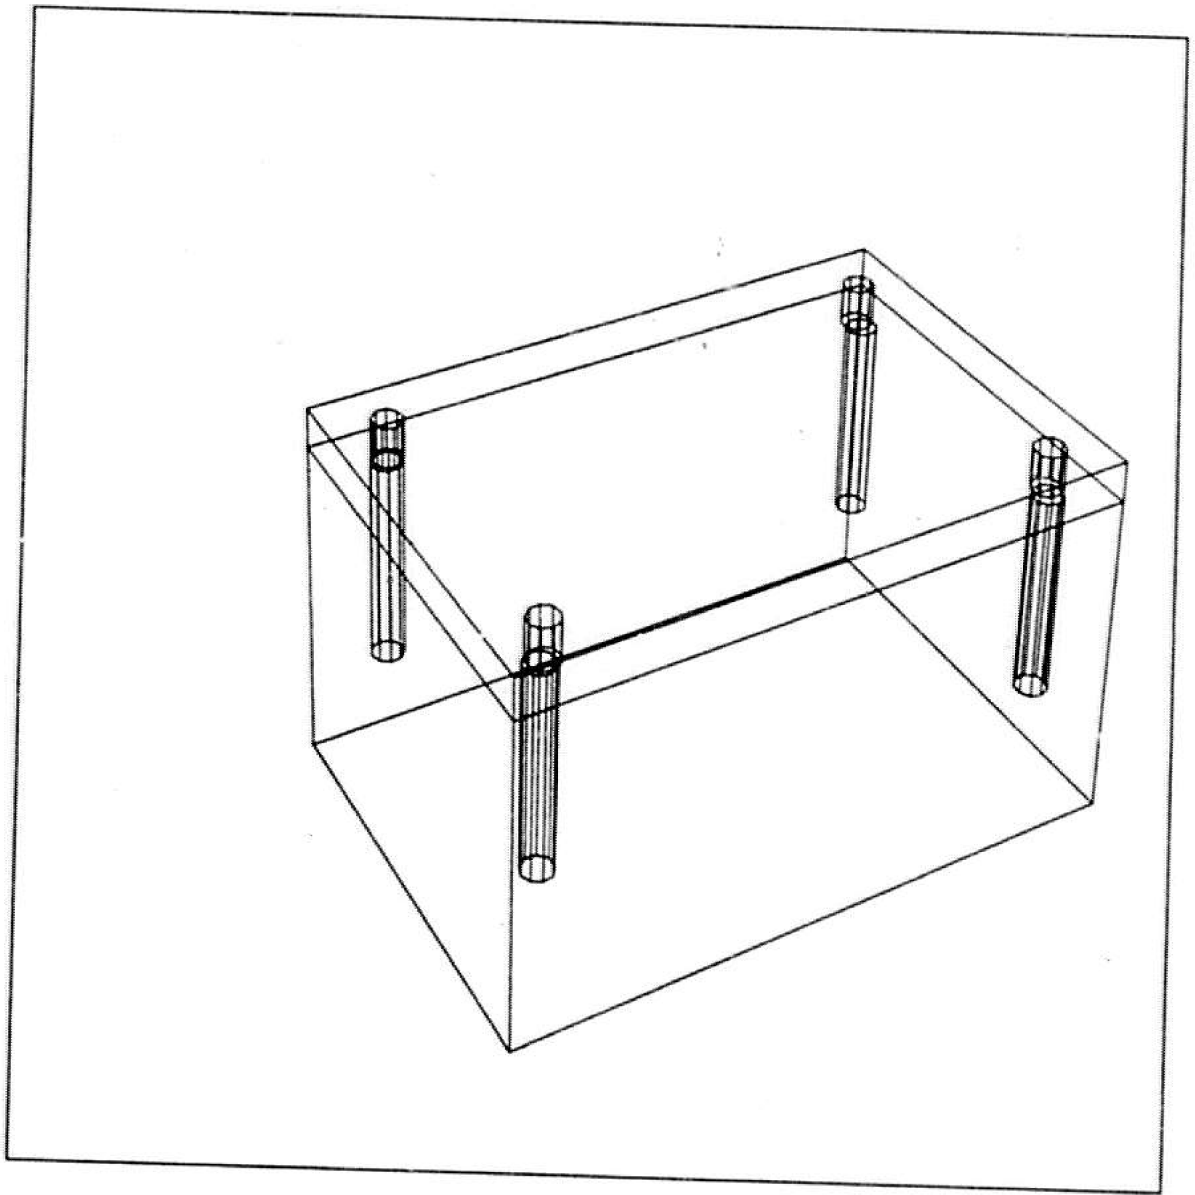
Drawing of Unsuccessful Box and Lid Assembly
